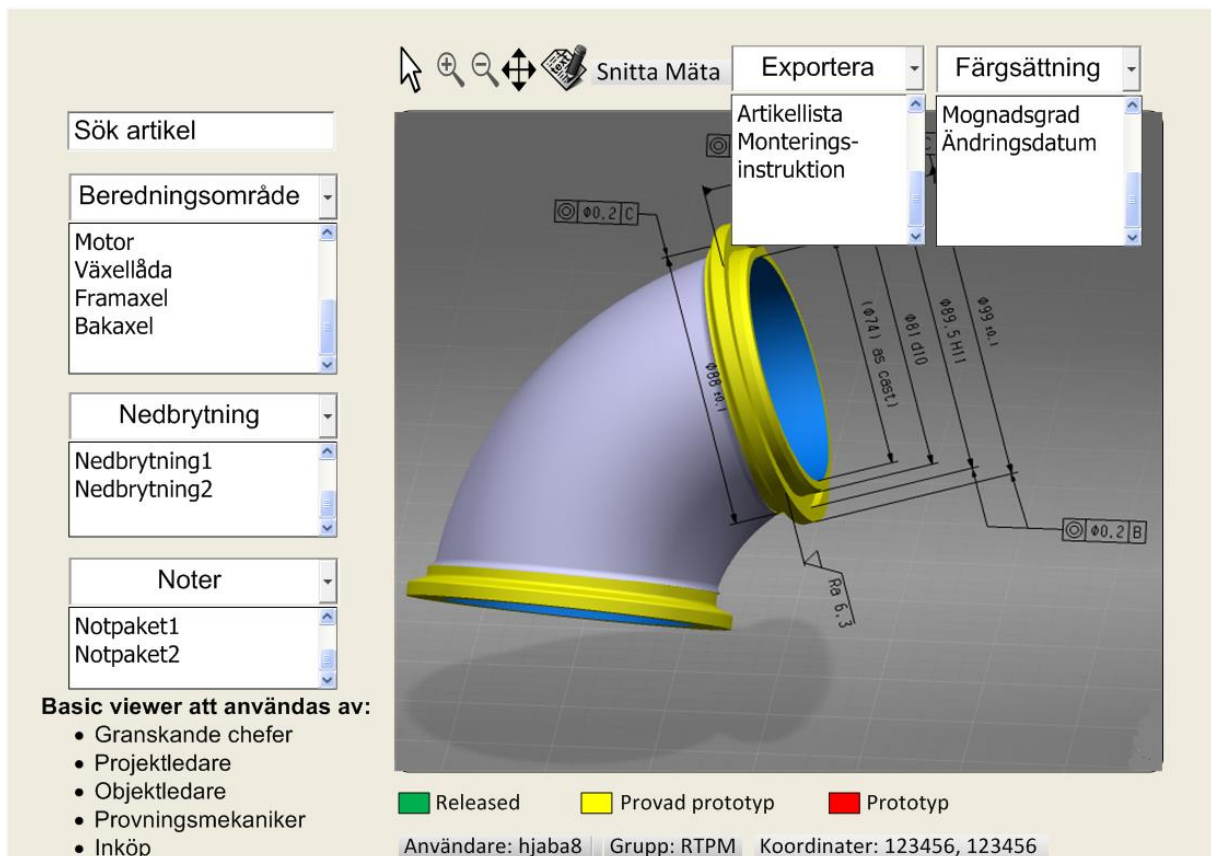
Concept drawing of a basic level viewing tool (designed by the authors)
